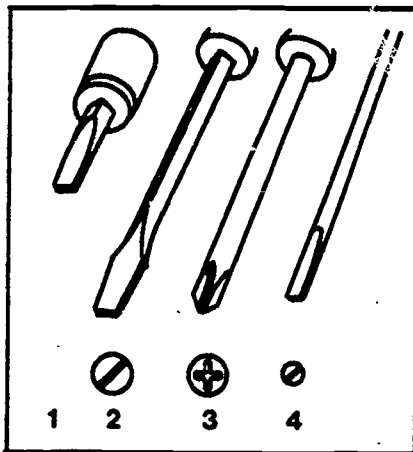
Typical screwdriver assemblies. (The Hand Tool Institute)
